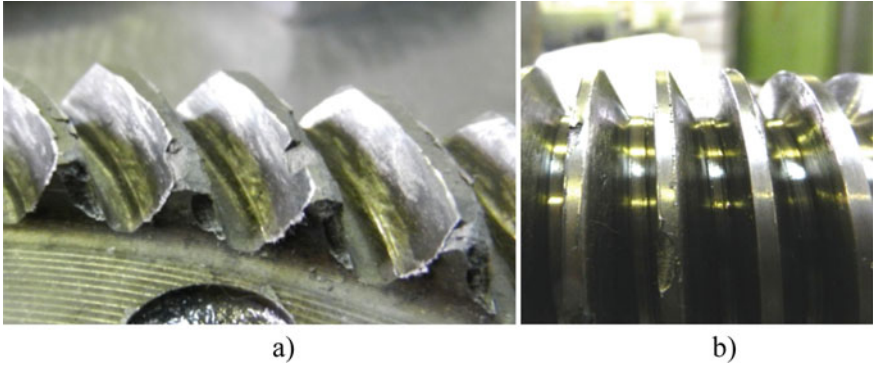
Chippage on a gearwheel teeth, b worm threads
